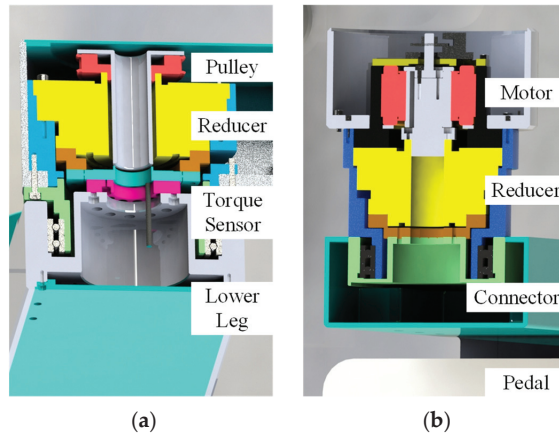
Section view of joint drivetrain: (a) knee joint and (b) ankle joint.
